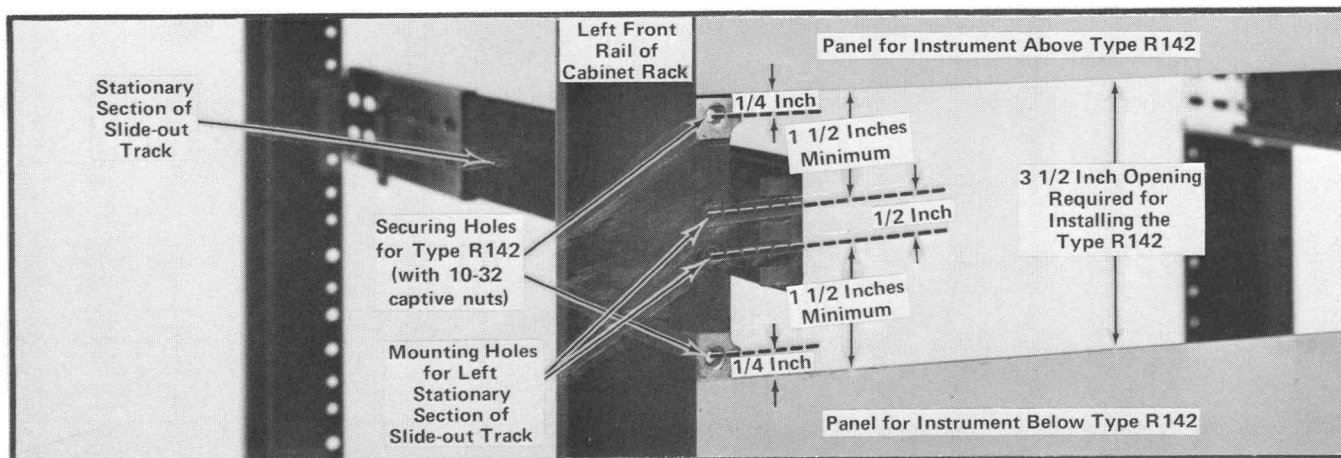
Vertical mounting position of the left stationary section and location of the securing holes. These same dimensions apply to the right front rail.
